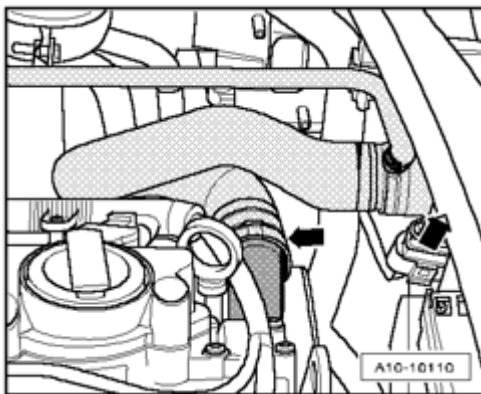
Removing Left Front Coolant Hose In Engine Compartment
